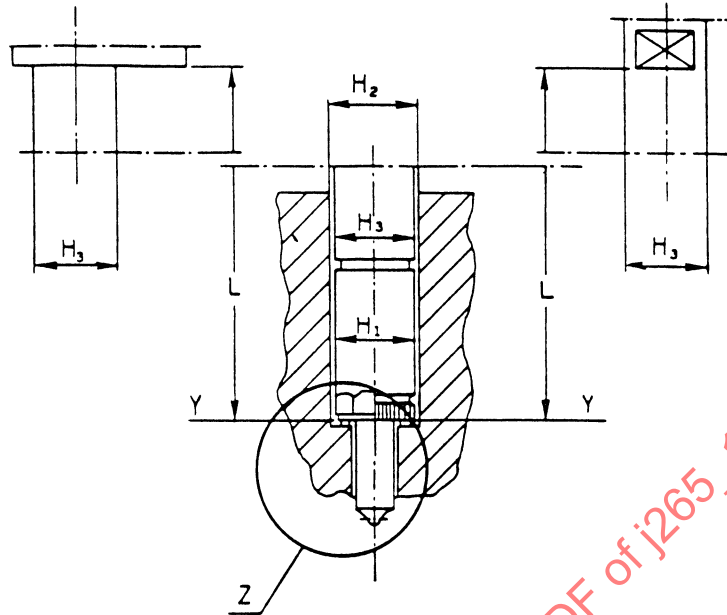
NOZZLE HOLDER WITH TWO FIXING FLATS TYPES 9 AND 11
